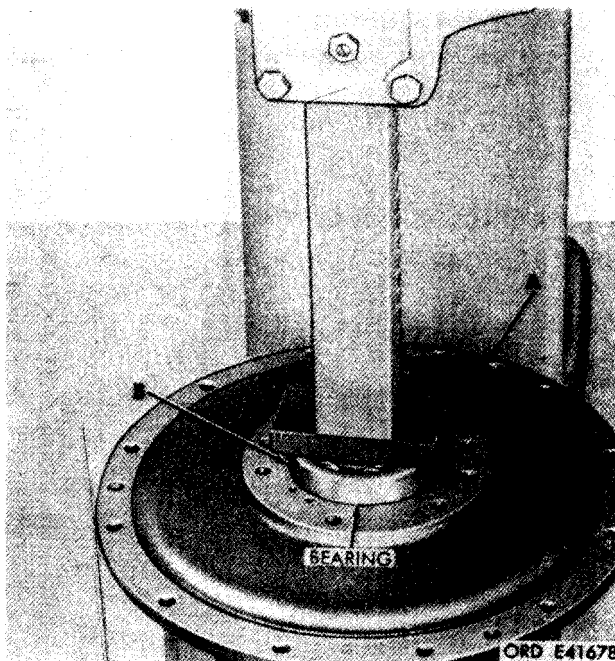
Removing fan drive clutch upper ball bearing from housing cover.
